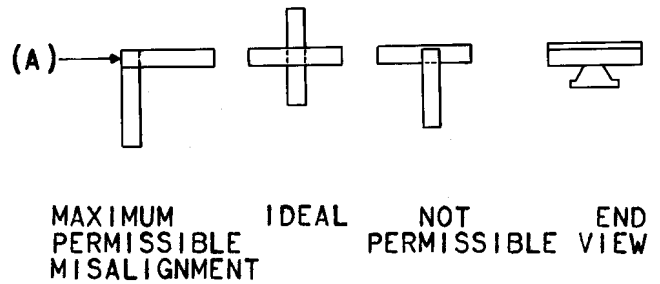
Alignment of Standard Bar-Type Contacts—Plan View of Contact Surfaces
